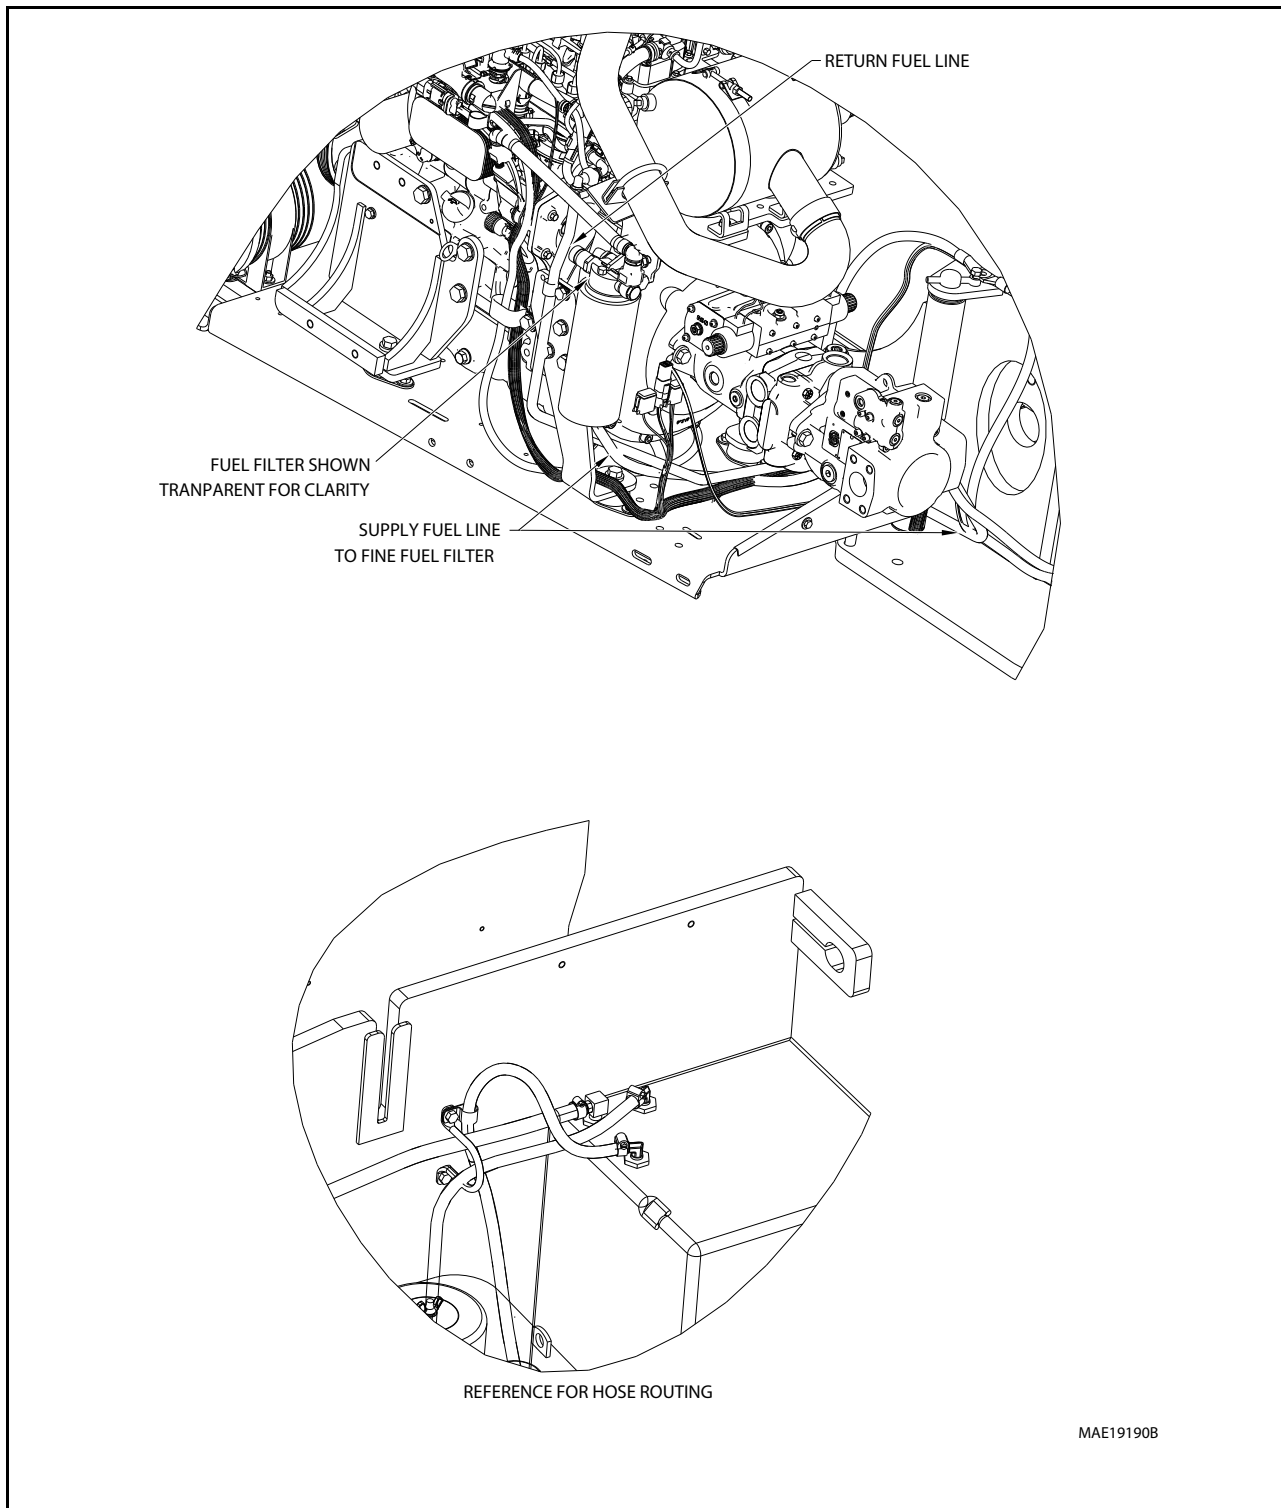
Deutz TD2.9L4 China III Engine Installation - Sheet 3 of 7
